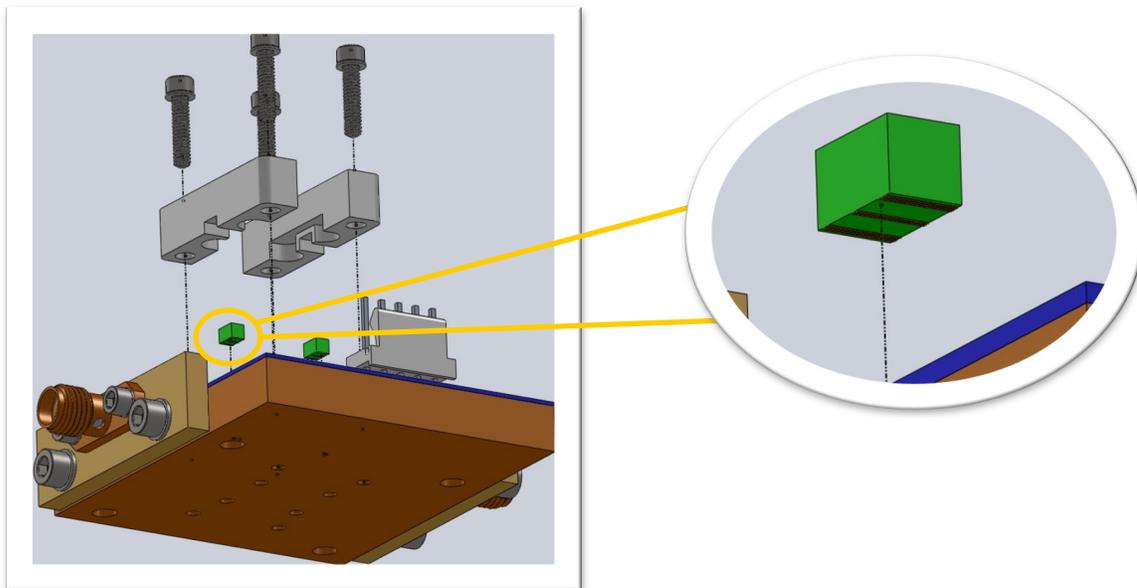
Exploded View Showing Orientation of Compression Strips to Test Fixture
